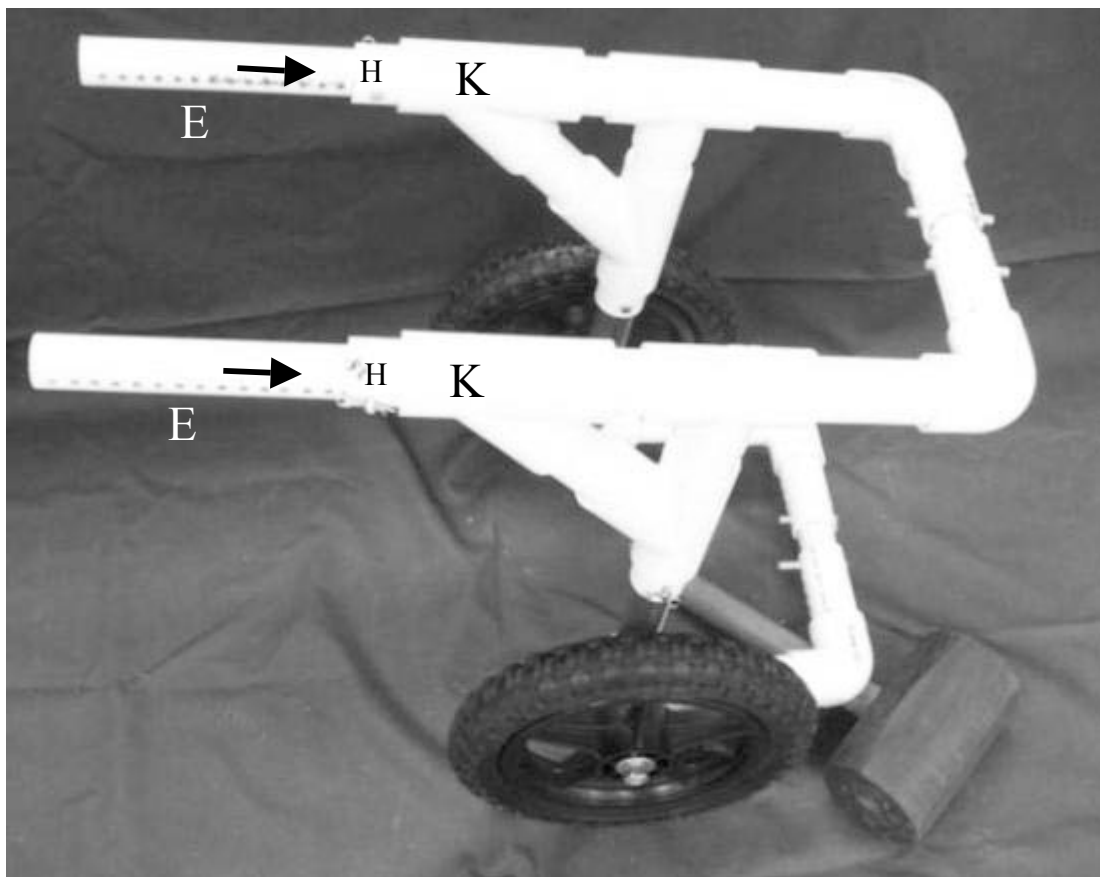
Final Canine Wheelchair Frame Assembly with Wheels.
